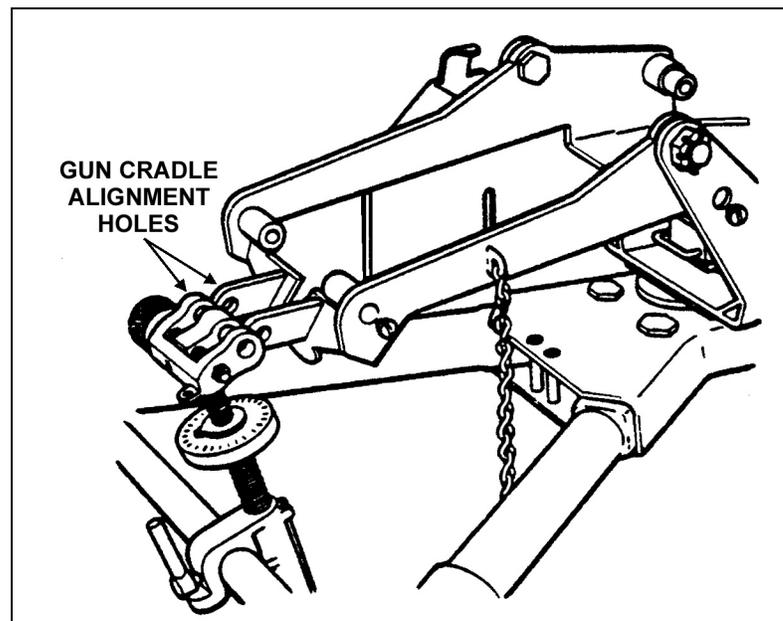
Alignment of gun cradle to T&E mechanism.
